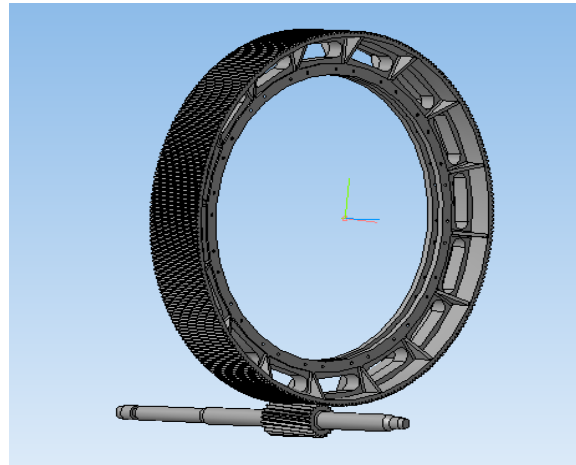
3D model of assembly of a cogwheel and gear wheel
